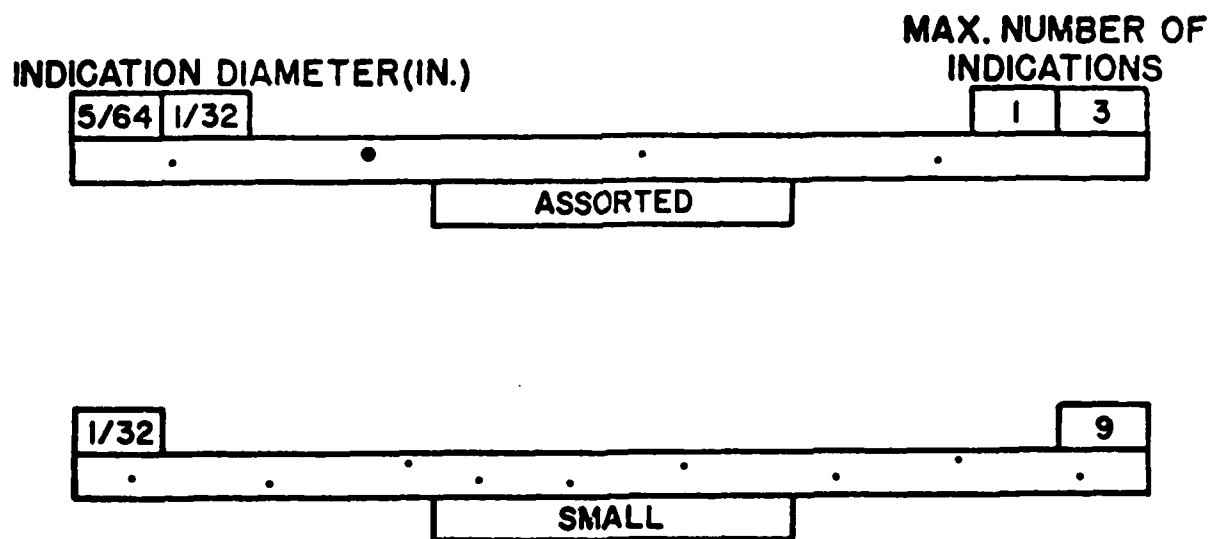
Class 2 Weld Surface Inspection Standards for Scattered Rounded or Non-Linear Indications (Sheet 1 of 6).
